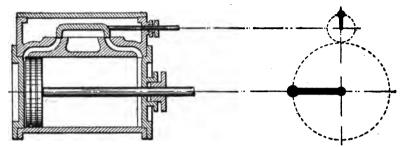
Cylinder Details Showing Plain Slide Valve without Lap in Mid-Position
